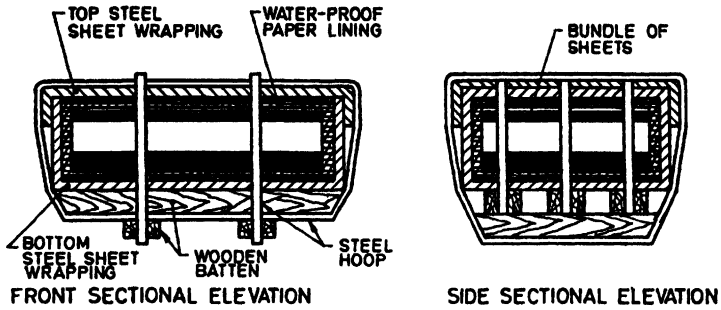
DETAILS OF ELECTRICAL STEEL SHEET PACKINGS IN CUT LENGTHS
